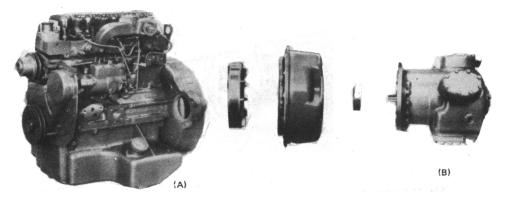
Rotating permanent magnet-type generator (Courtesy Carrier Transicold Co.)
